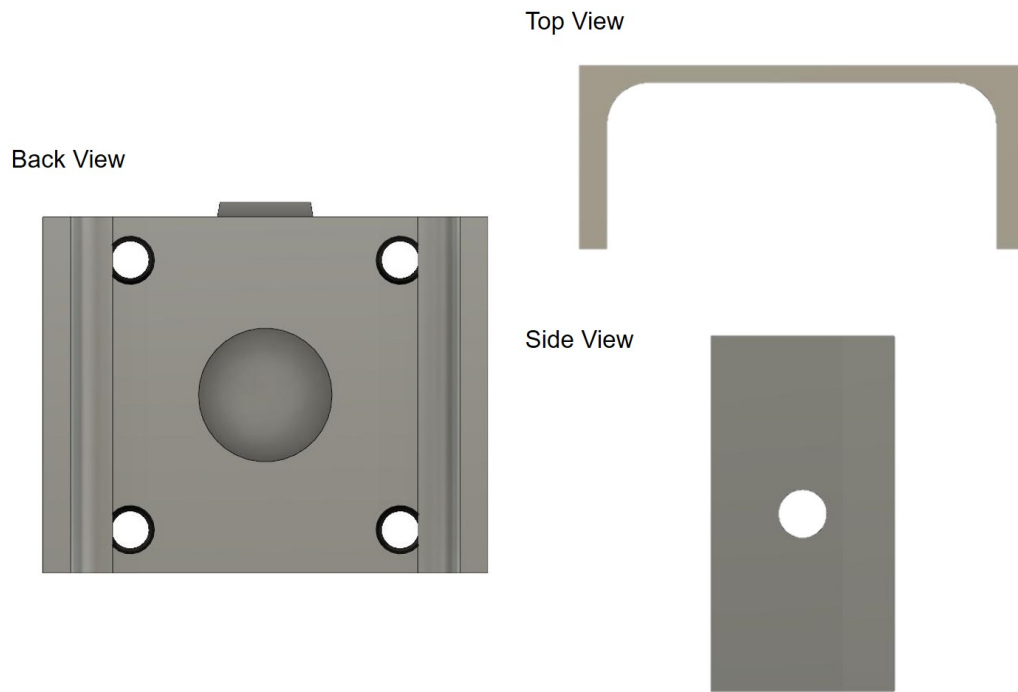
Back view, top view, and side view of the cylinder mount. The mount attached to the cylinder using $1/2'' - 13 \times 1\frac{1}{2}''$ brass bolts. The fixture fit through the runner of the sliding mount using two six-inch pieces of $3/8'' - 16$ brass threaded rod, nylon washers, and $3/8'' - 16$ brass wing nuts.
